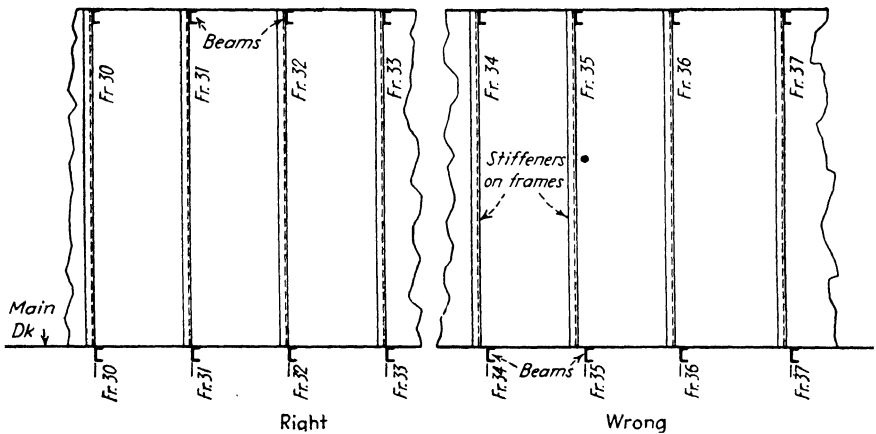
Frame lines not matching up under stiffeners of deck houses.
